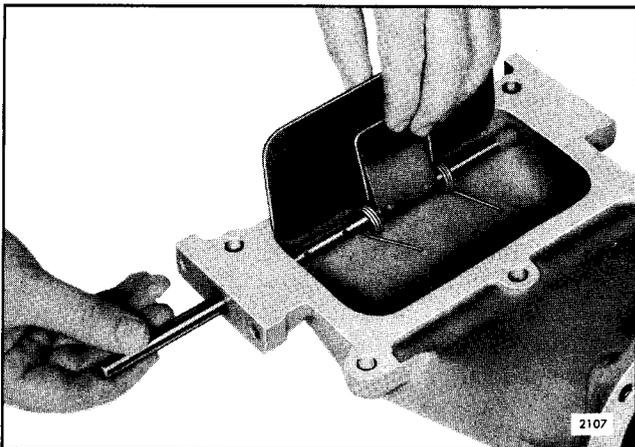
Installing Air Shutoff Valve Spring and Valve
